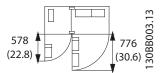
Front Clearance of IP21/IP54 Enclosure Type, Frame Size F1
